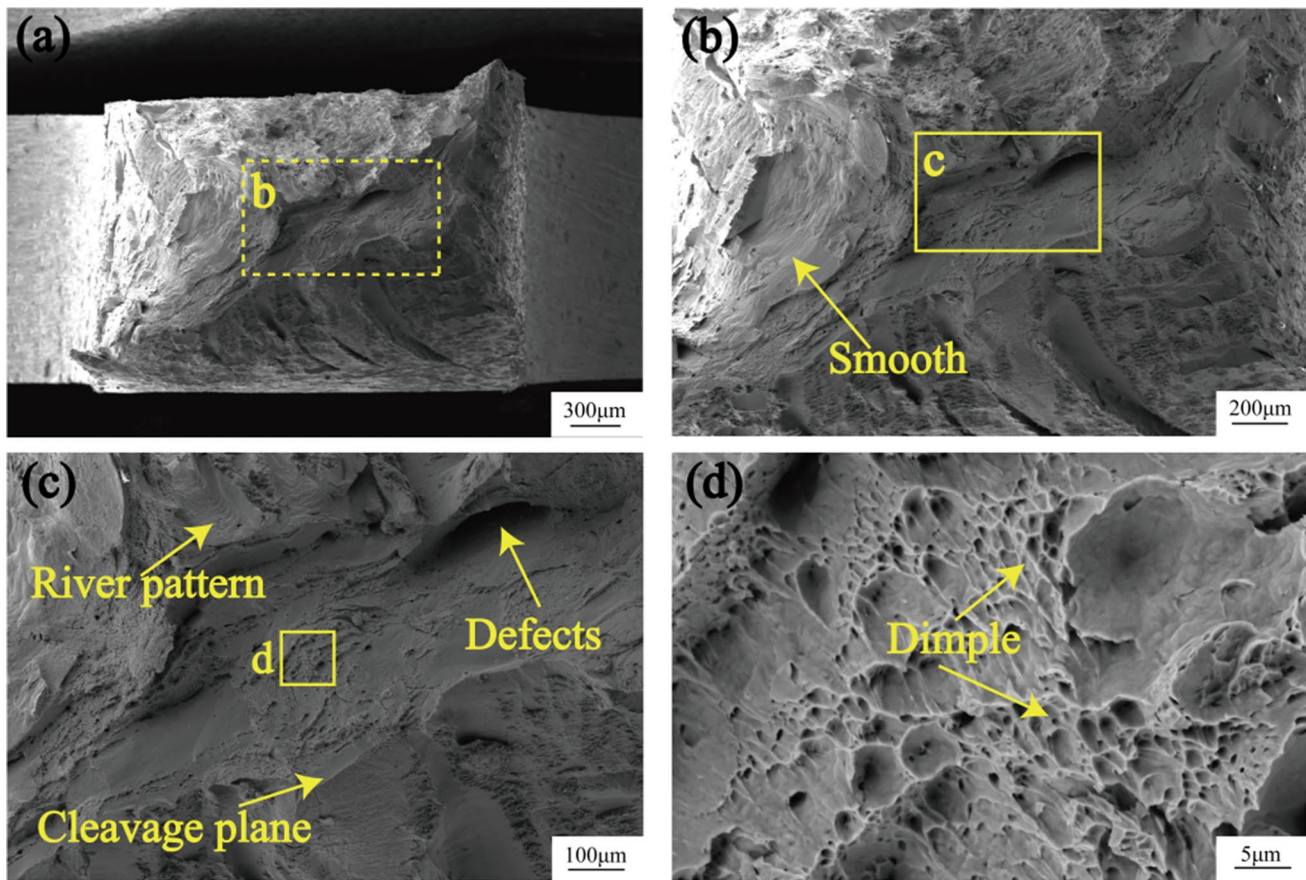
No. 6 tensile fracture morphology of welded joints. a Macroscopic fracture morphology of weld joints; b partial enlarged view of a; c partial enlarged view of b; d partial enlarged view of c
